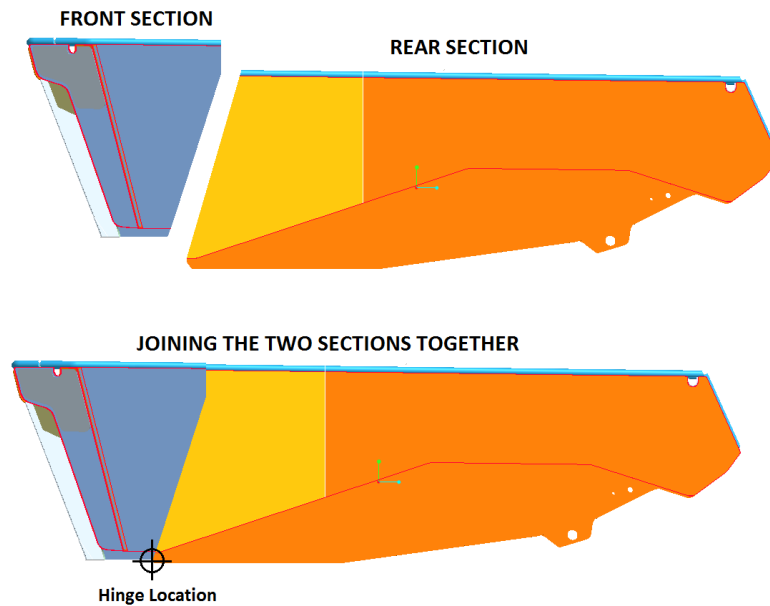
Side view of the front and rear sections forming the Folding Box Concept 1
